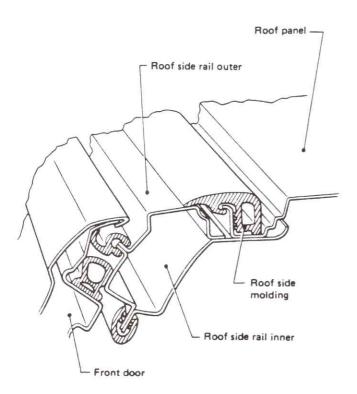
Door weather strips and side moulding (Sec 29)
